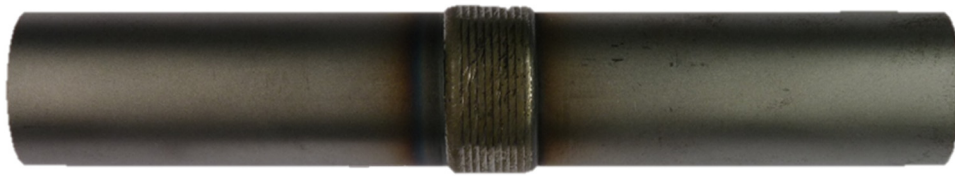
Shaft with cladding applied by laser metal deposition with wire.
